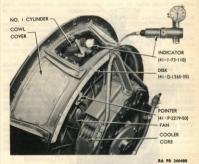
Engine Timing Disk, Pointer, and Top Dead Center Indicator Installed
